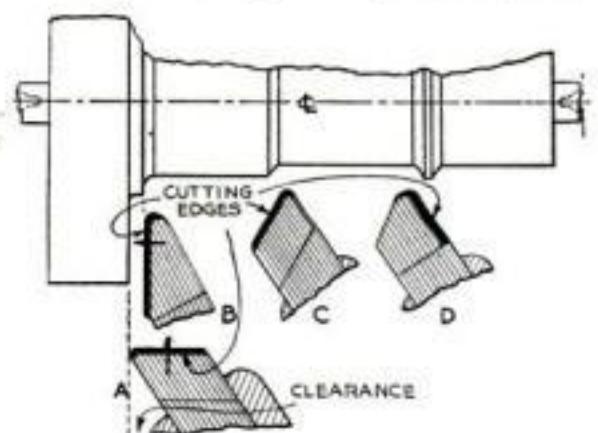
Much time can be saved by using tool bits shaped for each particular purpose.
